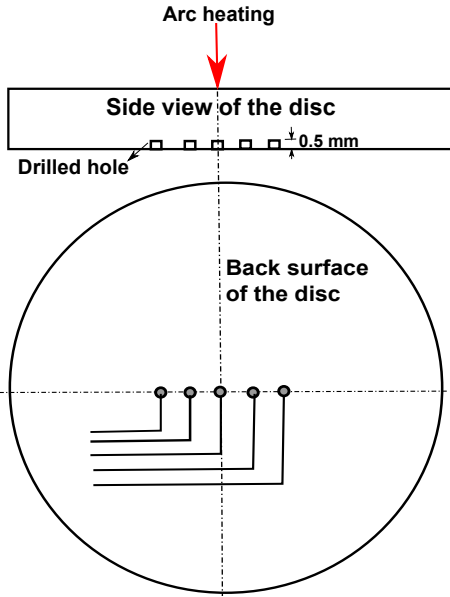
The locations of the thermocouples for temperature measurements when welding
